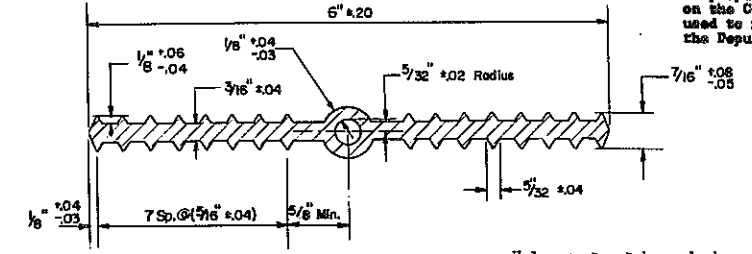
DETAIL FOR CUTTING AND BENDING SEAL (M38PE)
